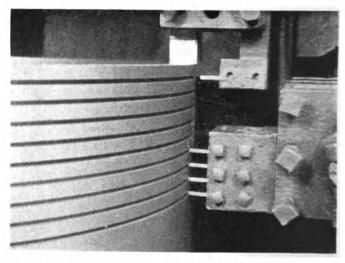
The gang tool cutting grooves in the tub—The parting tool is shown at the top ready to be used, while the facing tool is seen in action
